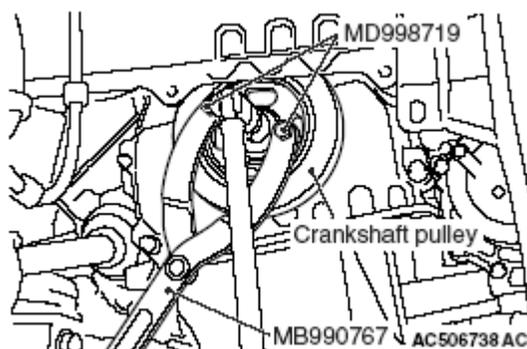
Identifying Crankshaft Drive Sprocket With Special Tools MB990767 And MD998719
